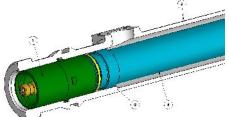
Schematic representation of the channel closure mounting inside of end fitting
